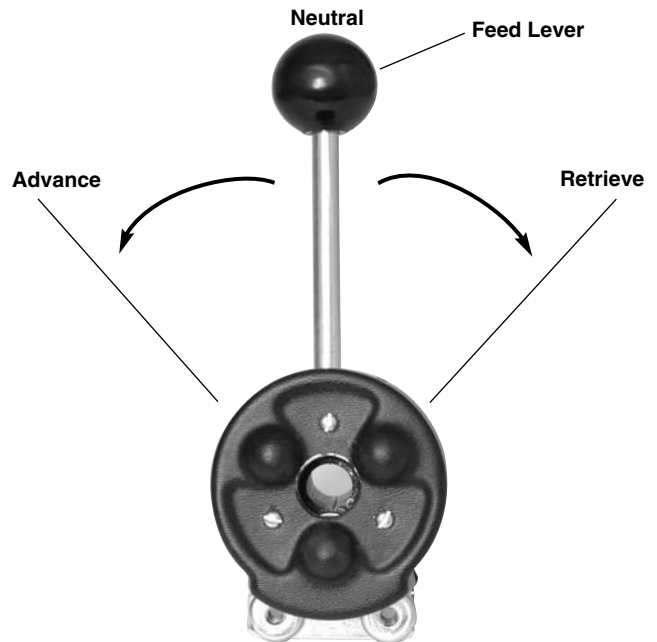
AUTOFEED Directions (Viewed From Front of Machine)
